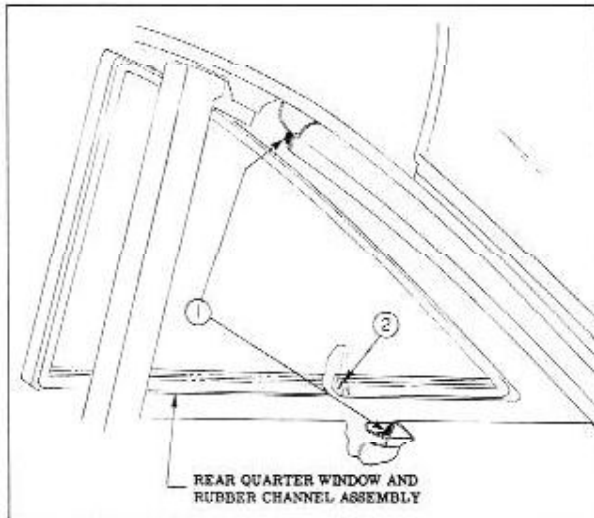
Sealing Rear Quarter Window and Outer Panel Rabbet
